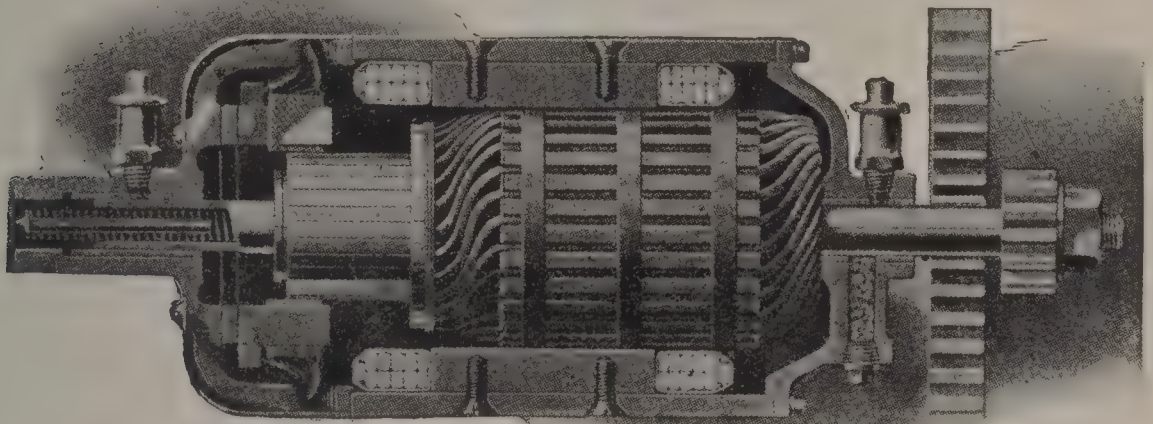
Sectional view of old Bosch-Rushmore starter. It is still a feature of Bosch products but has been improved decidedly
